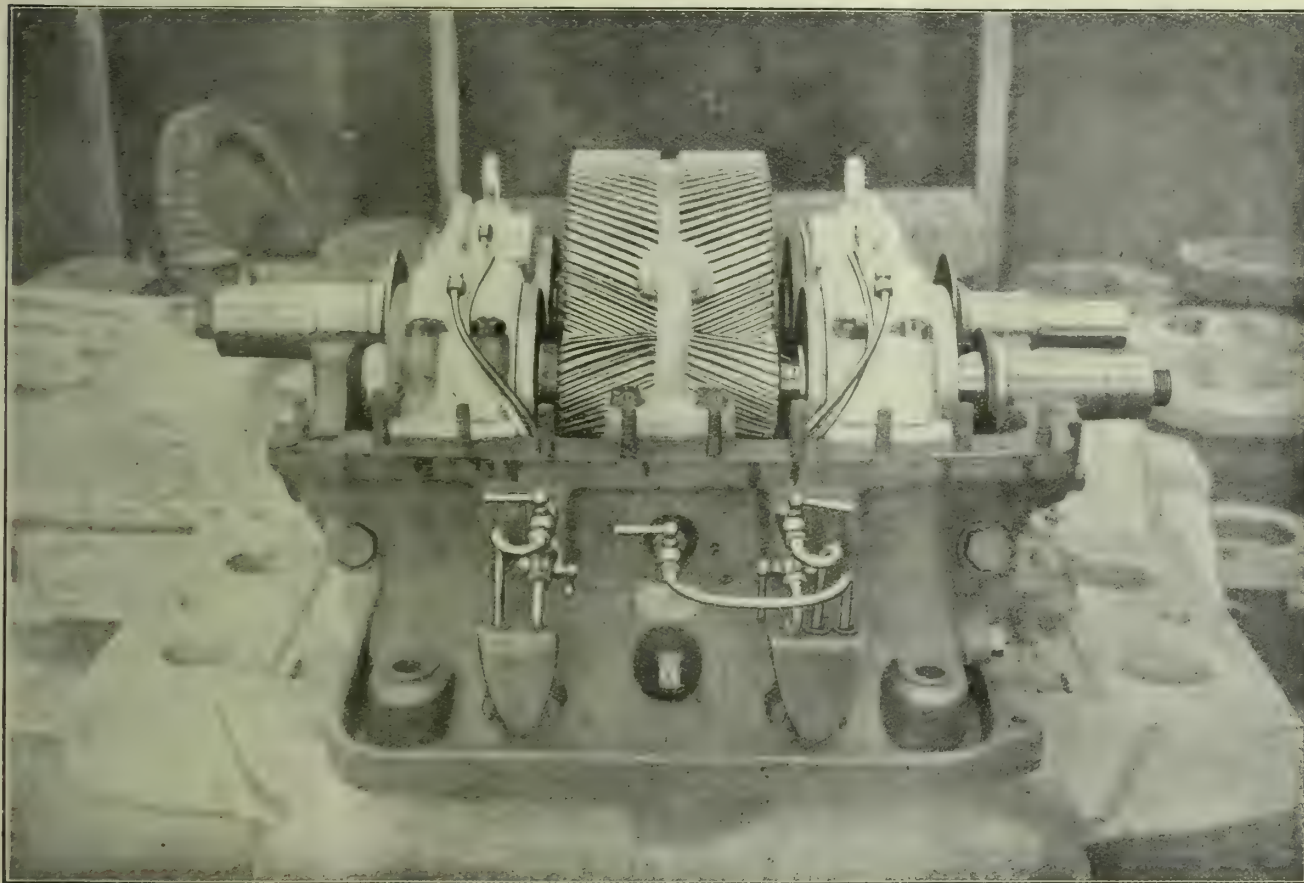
PLATE I.—SINGLE TURBINE REDUCING GEAR.
